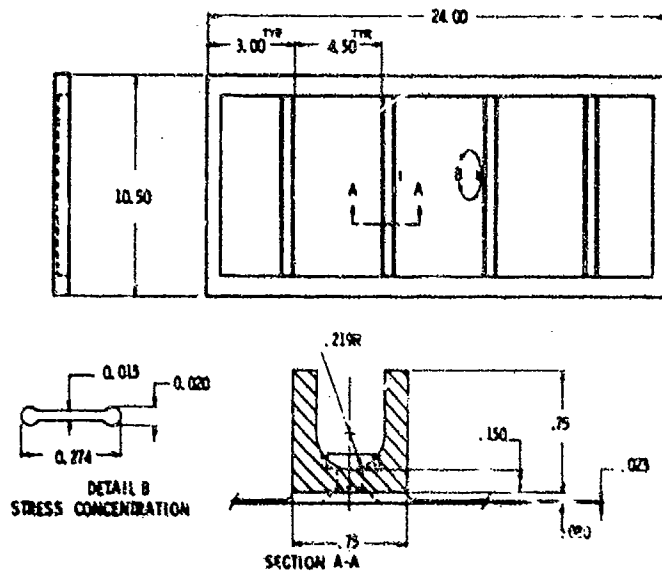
SKIN-STRINGER PANEL TYPE II
